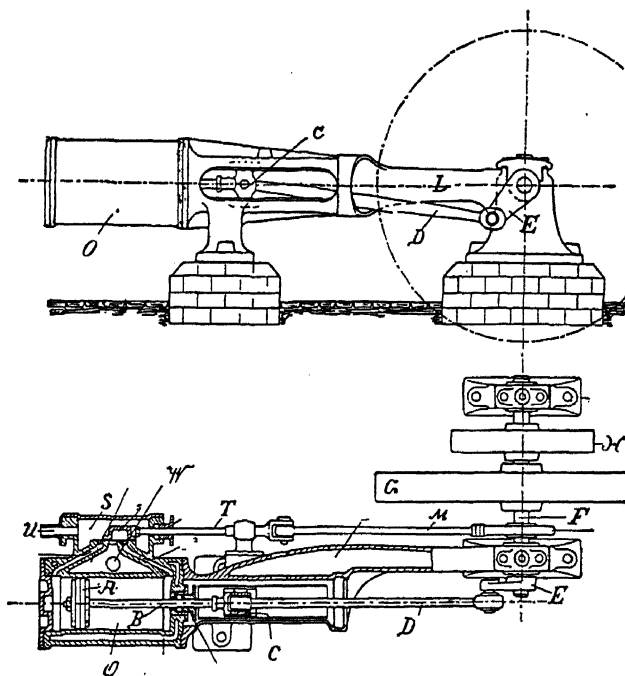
Single-cylinder Steam Engine with Simple Slide-valve Control
